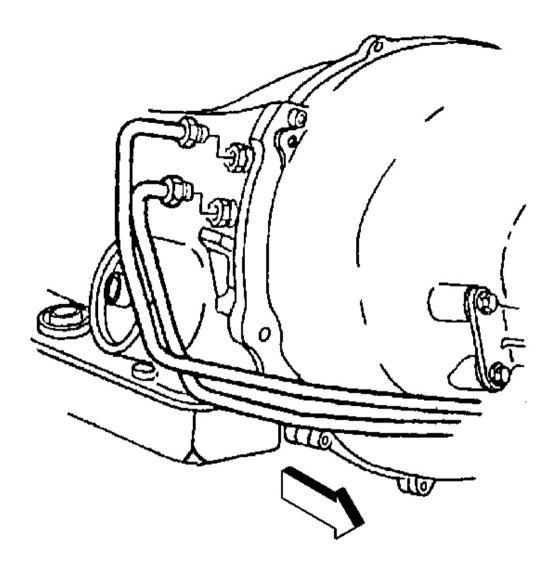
TOC Rear Upper & Lower Pipe Fittings Courtesy of GENERAL MOTORS CORP.
